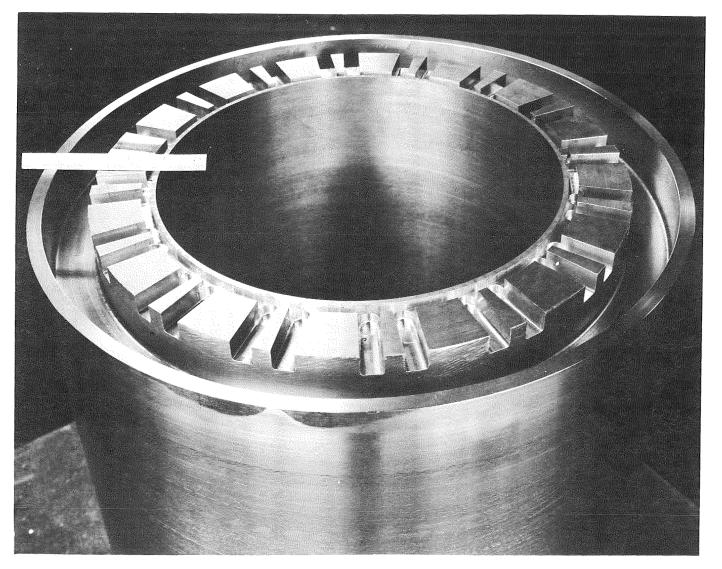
SPOOLPIECE 1 SETUP: FOR WELDING RIBS TO SHELL FORGING
